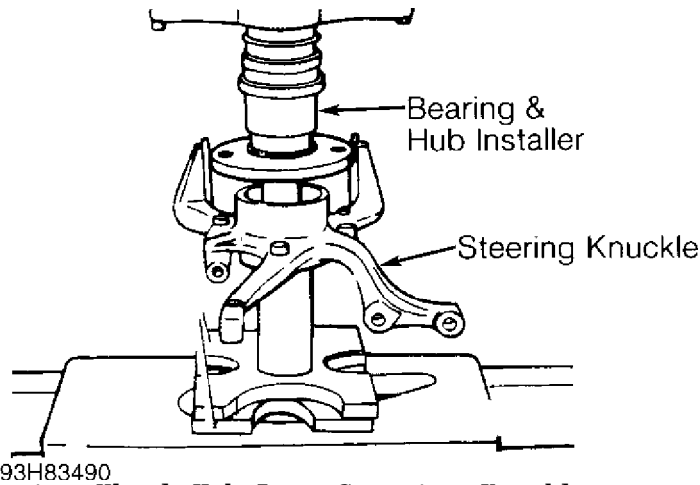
Pressing Wheel Hub Into Steering Knuckle
